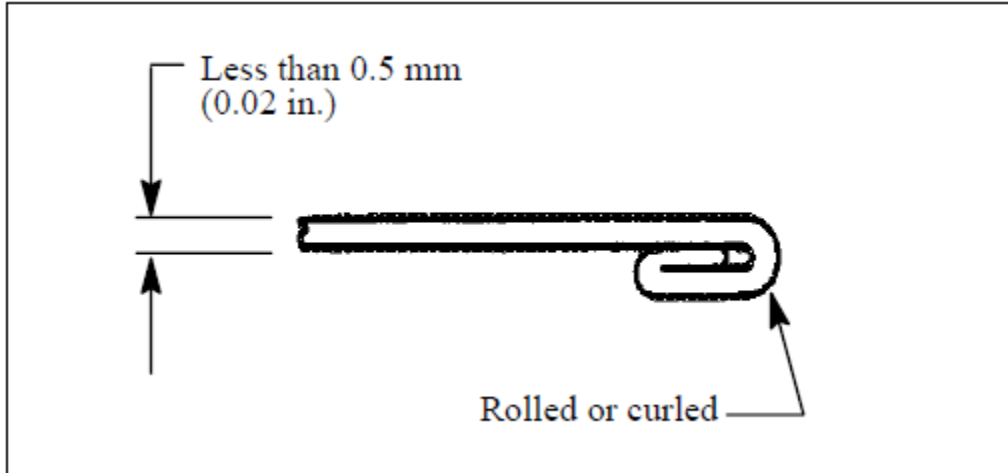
REQUIREMENTS FOR CURLING OF SHEETS LESS THAN 0.02 INCH (0.5 MM) THICK
